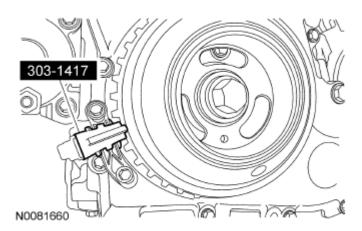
Identifying Crankshaft Sensor Aligner Courtesy of FORD MOTOR CO.
